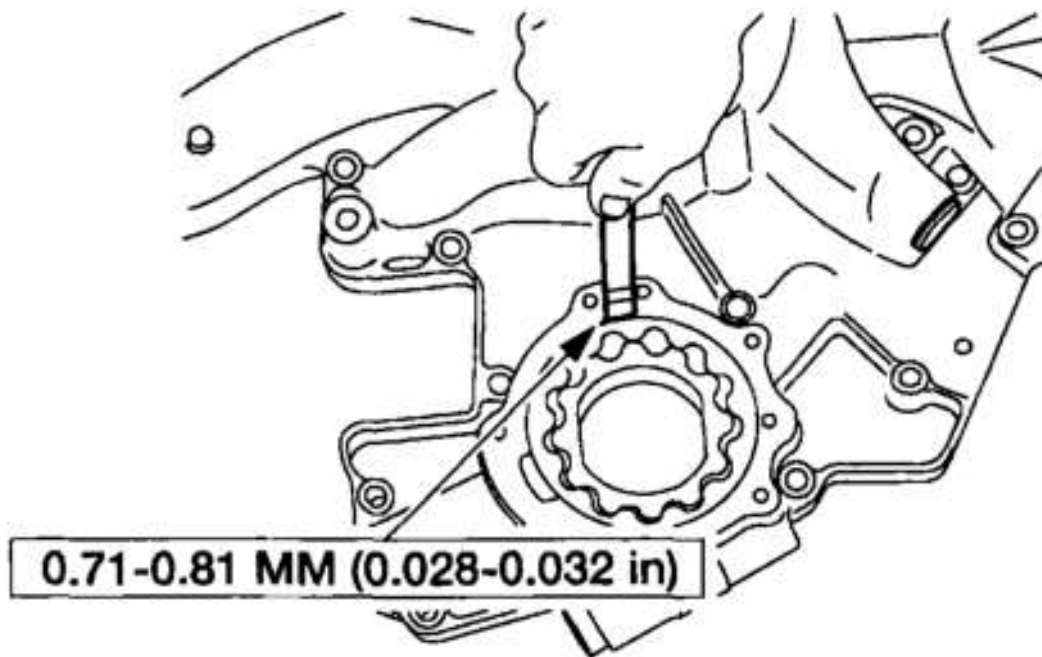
Measuring Height Clearance Between Oil Pump Housing & Rotors
